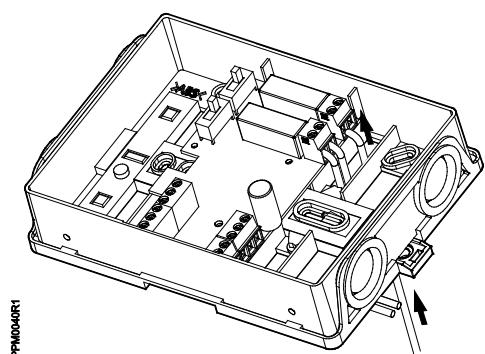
Removing the DIN clip before mounting to a flat surface.
